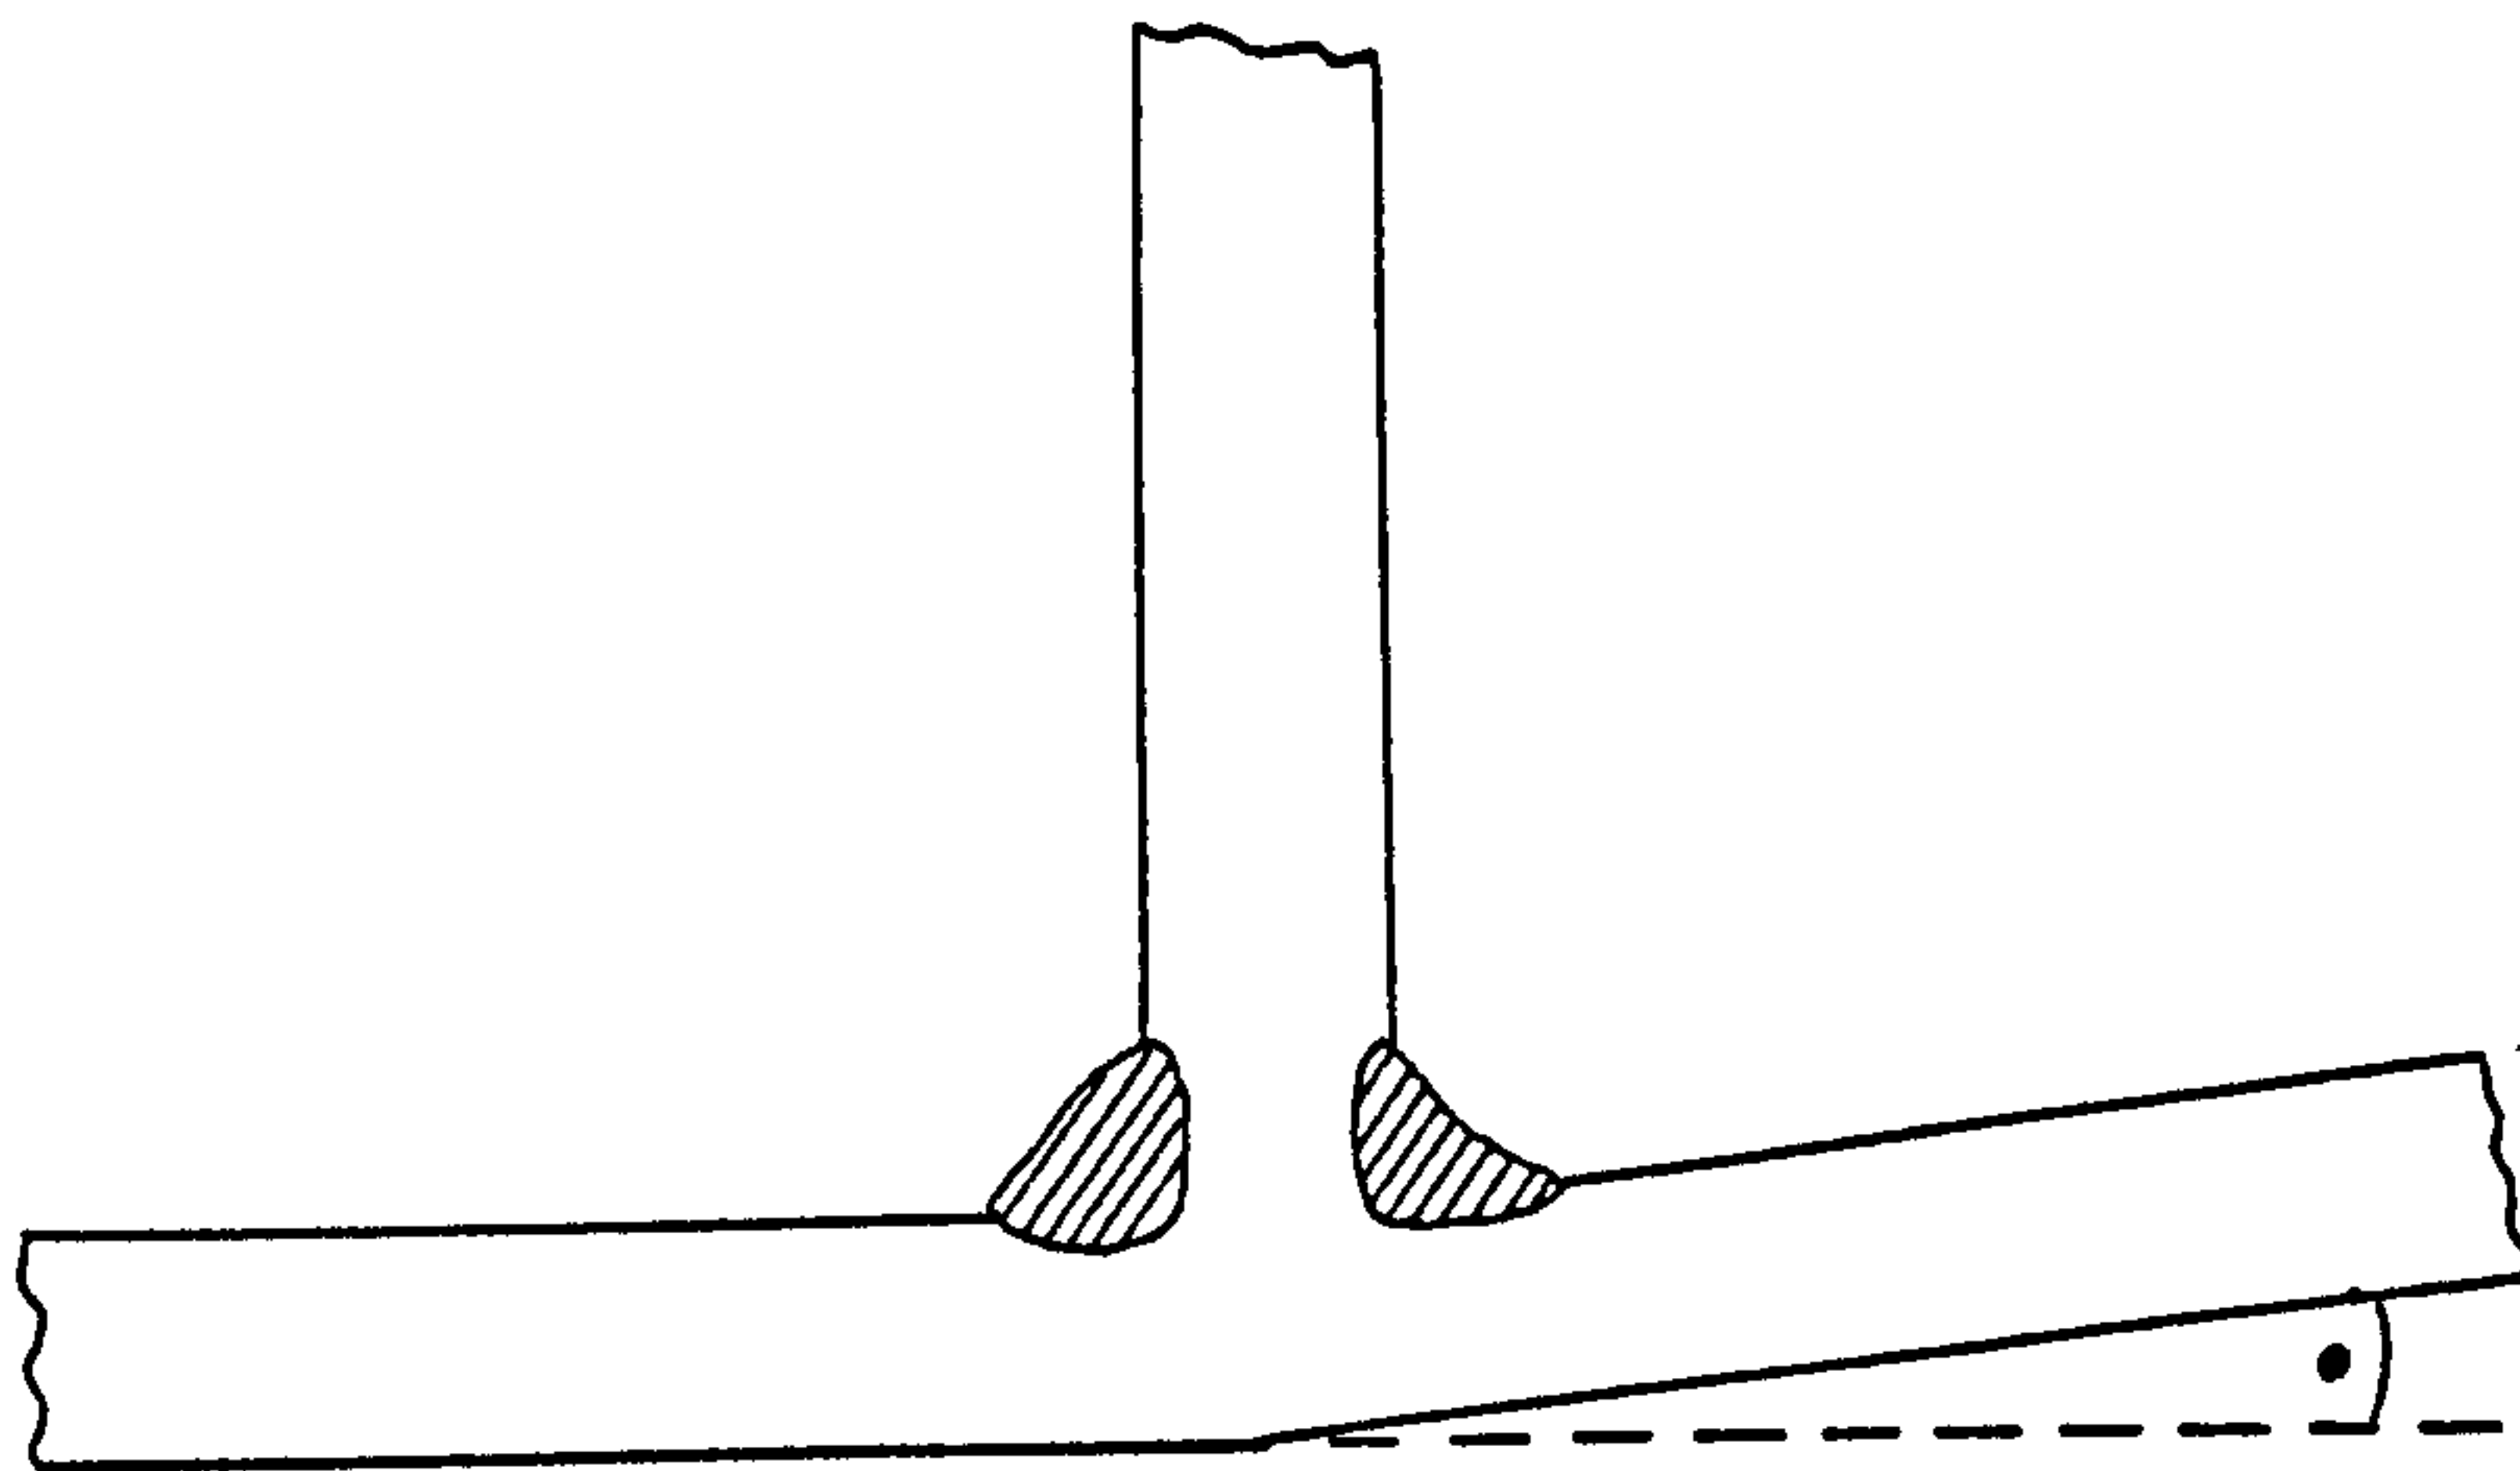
Included angle distortion of welded tee joints
